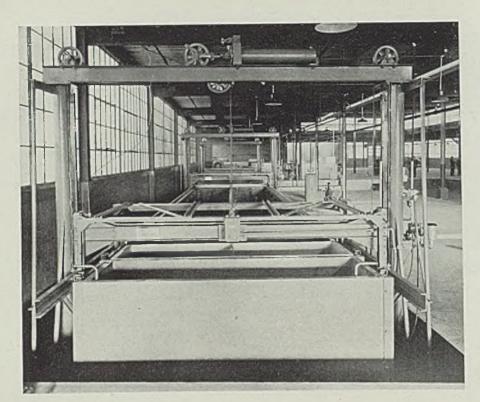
Closeup of automatic transfer unit at E, Fig. 1
